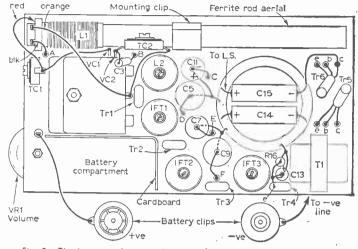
The layout and wiring diagram of the rear of the receiver panel.
